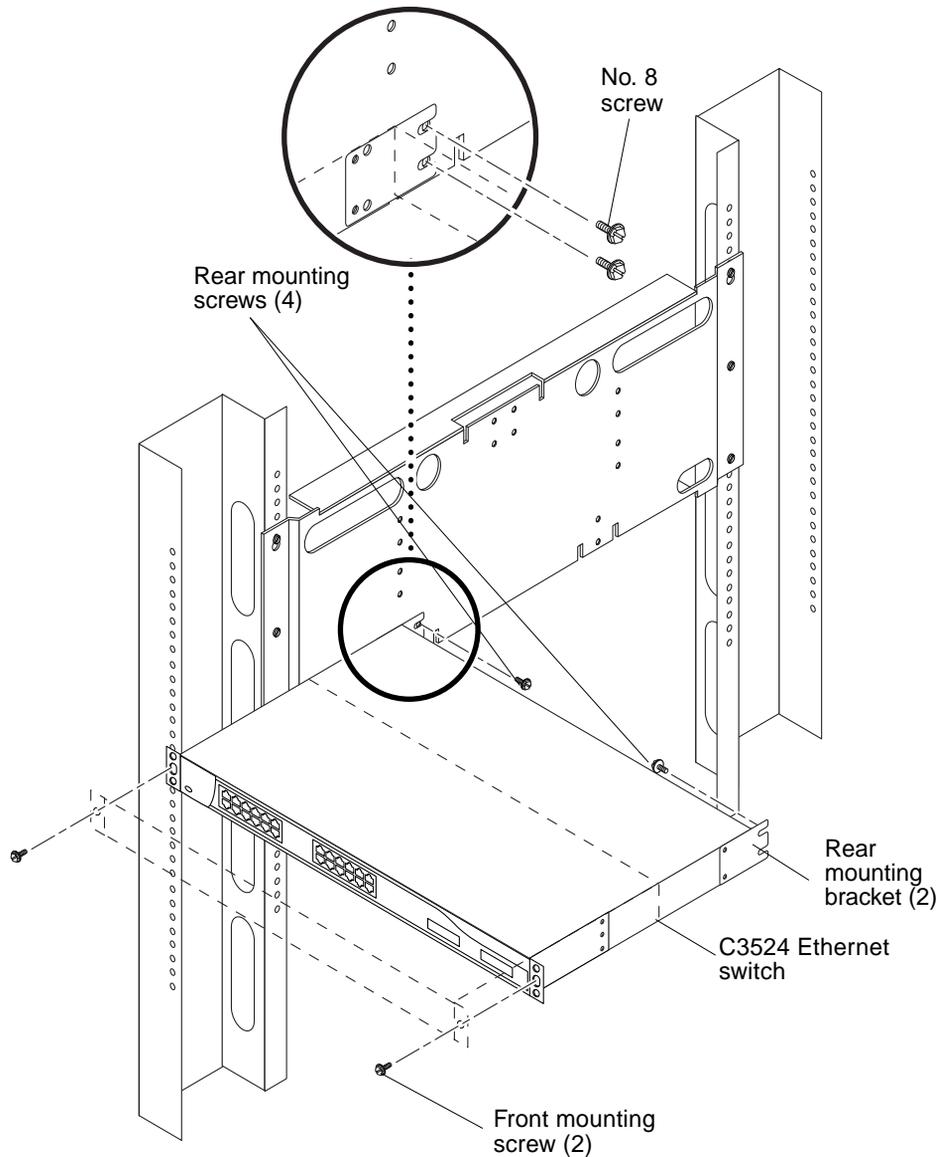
Removing and Replacing the C3524 Ethernet Switch
